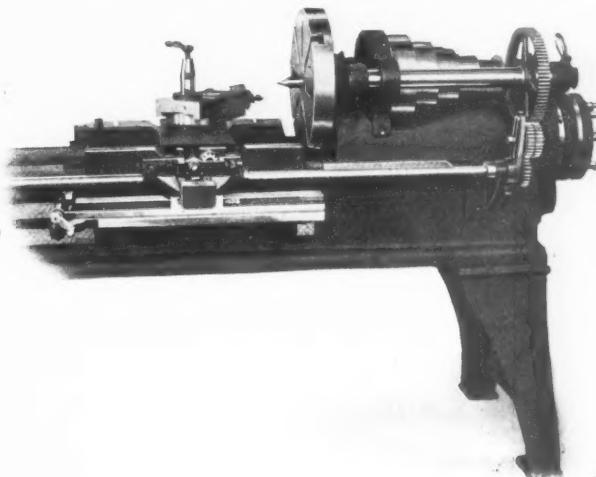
Relieving Attachment for Hamilton Lathes, which works at any Angle.
